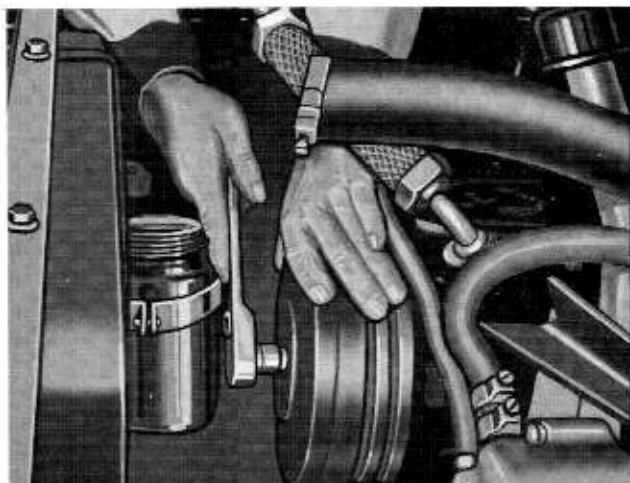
B-4—Removing the Locking Cap Screw and Washer—(61LT-8811)
